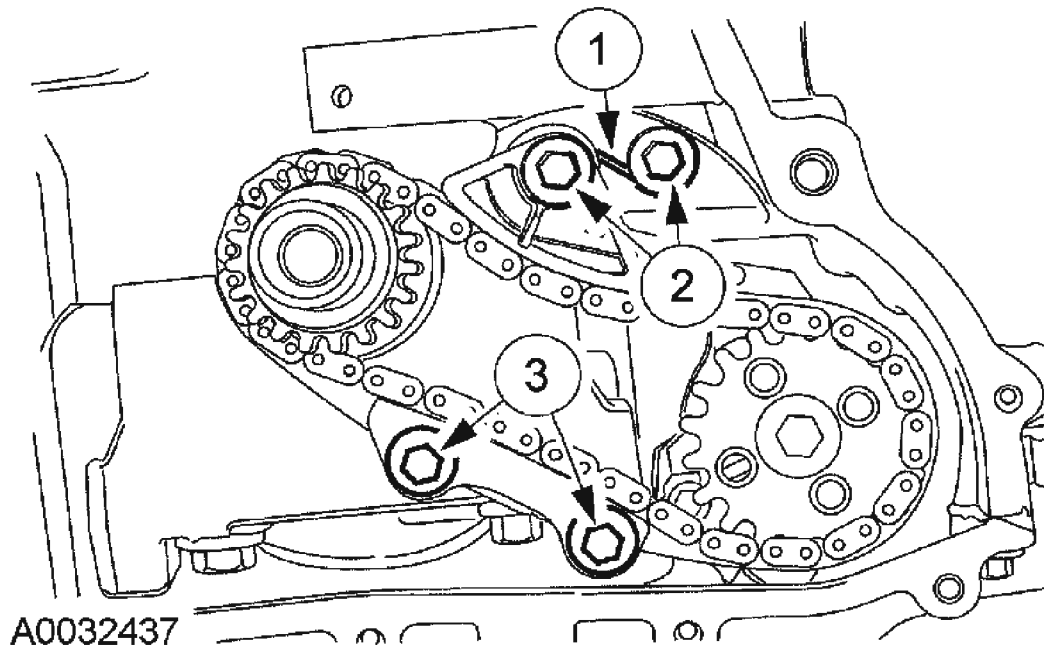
Removing Oil Pump Chain Tensioner And Guide
